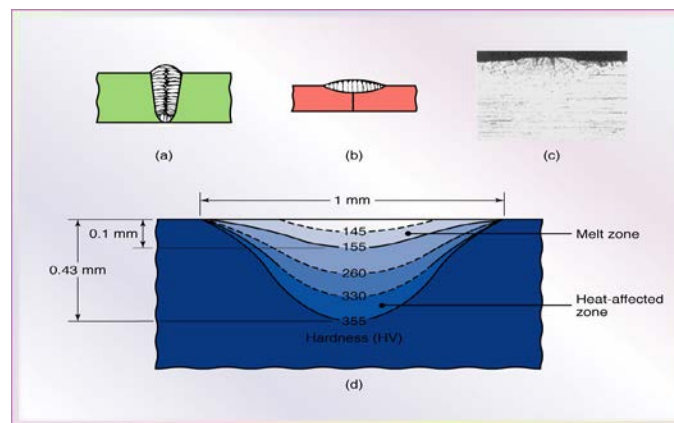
Grain structure in (a) deep weld and (b) shallow weld. (c) Weld bead on a cold-rolled nickel strip produced by a laser beam. (d) Microhardness (HV) profile across a weld bead
